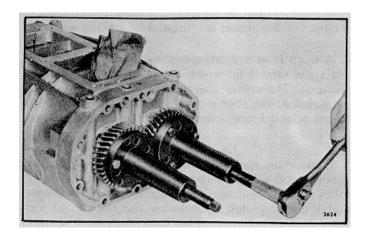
Removing Blower Gears with Tool J 6270-31
